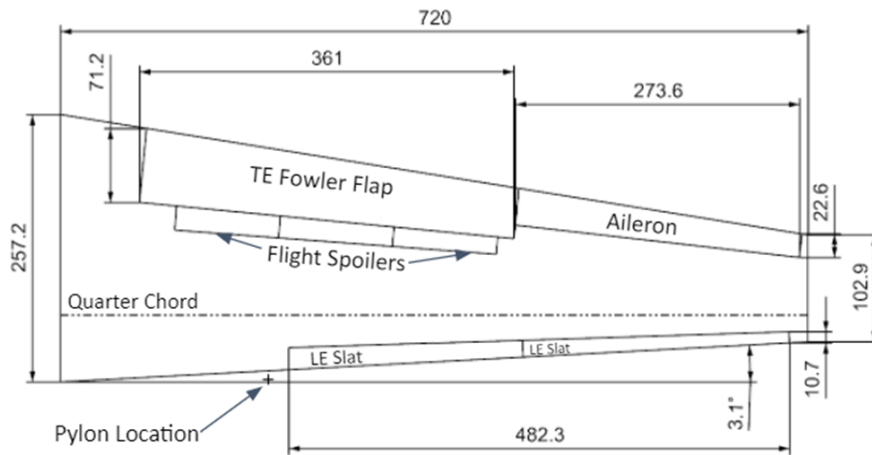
Top Drawing of Major Wing Dimensions with Control Surfaces Layout (inches).
